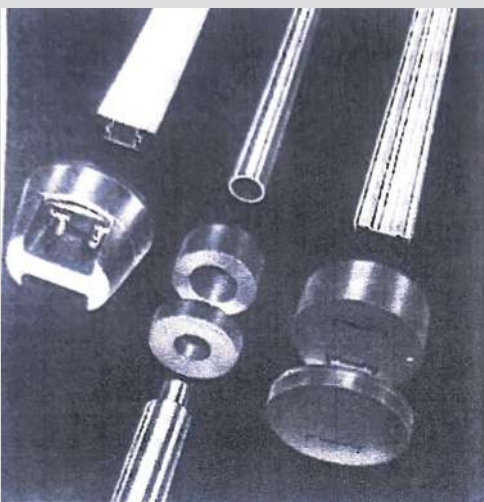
Dies for magnesium extrusions (From right to Left): Flat die for shaped extrusions, mandrel with flat die for hollow extrusions, bridge die for hollow extrusions produced by the die, as in the case of solid extrusions, while the inner contour of the closed space is formed within the bridge die by a mandrel resting on the die bridges (Fig.3). During actual extrusion these bridges split the billet into several branches which recombine in the 'welding chambers' and receive the required shape while passing through the gap between the mandrel and the extrusion die. The metal branches are joined by welding, and as the welding chambers are filled with metal preventing the entry of oxygen from the air, no oxide film will be formed. The welds that are to be found on all hollow extrusions can only be detected by microstructural investigation.
